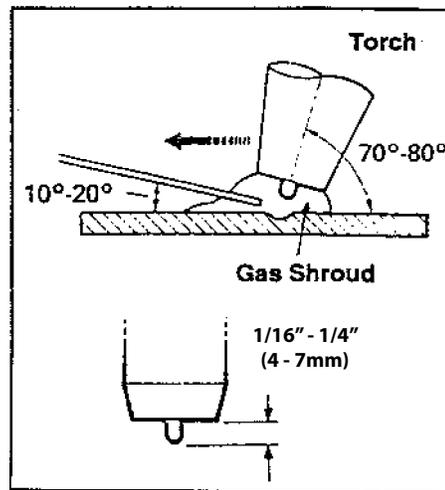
Torch and filler rod angles and Electrode stick-out
